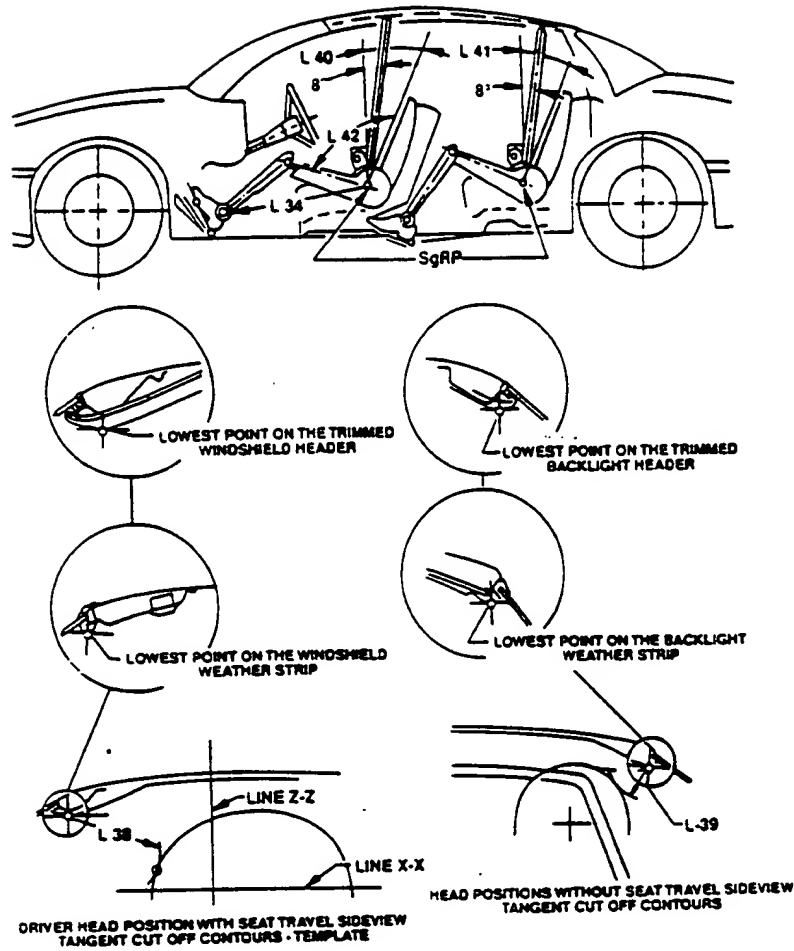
INTERIOR DIMENSIONS, LENGTH
